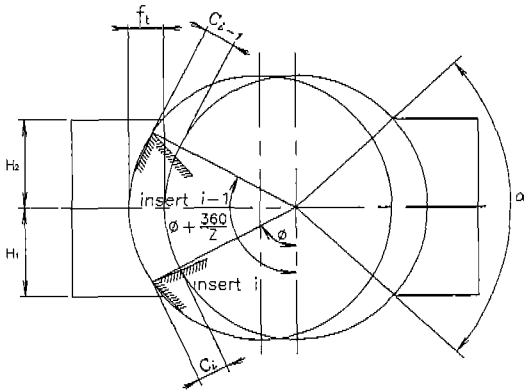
The instantaneous undeformed chip thickness according to insert and workpiece geometry.
